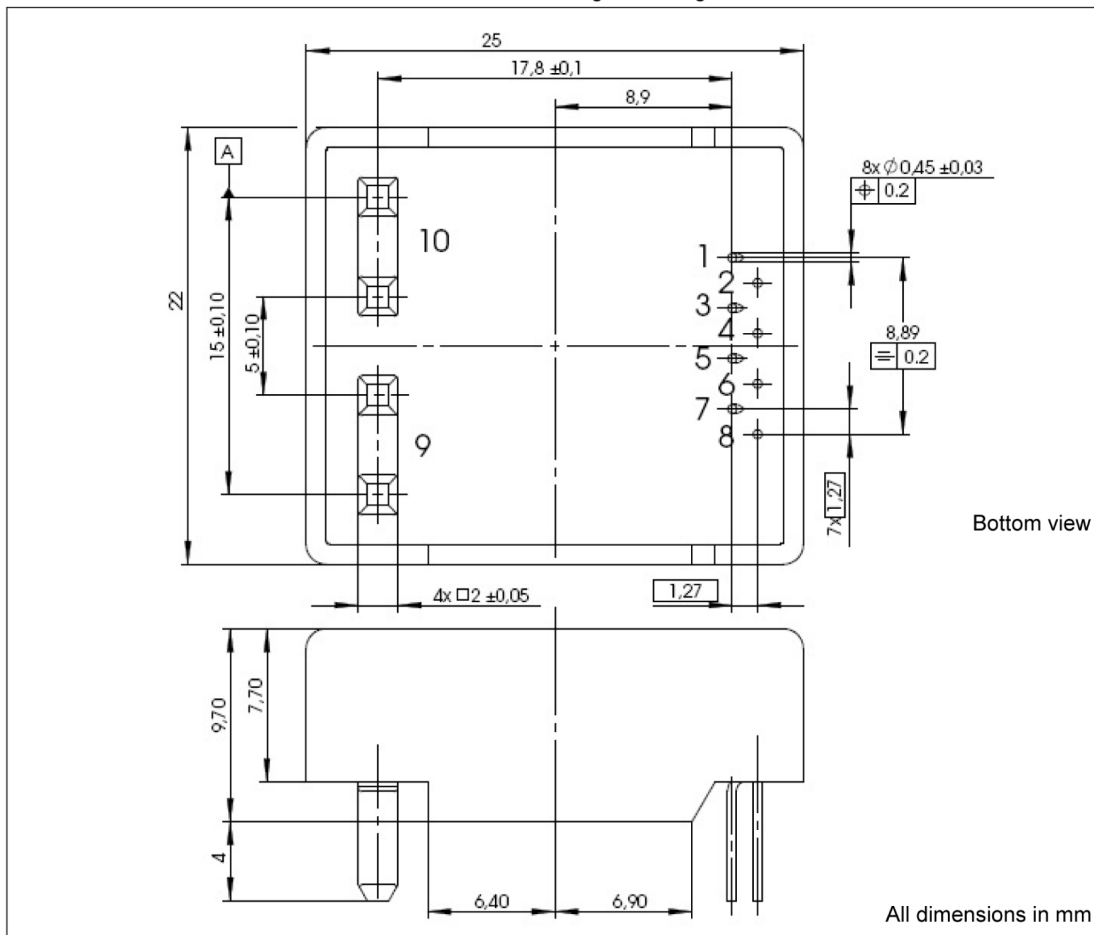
Package outline of THT-housing. Tolerance $\pm 0.2 \text{ mm}$ unless otherwise specified.
